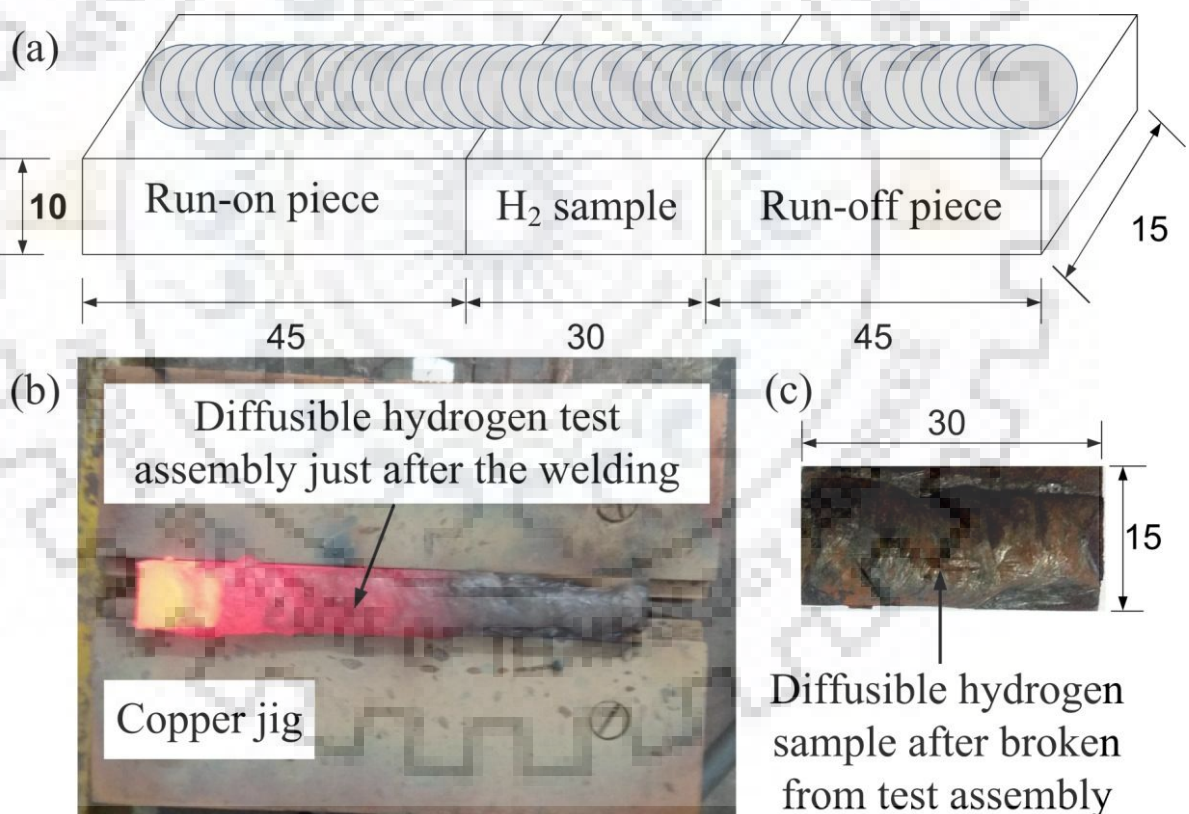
(a) Schematic of mercury method test assembly, (b) test assembly fixed on copper jig during after the deposited metal and (c) hydrogen sample after broken out from test assembly
